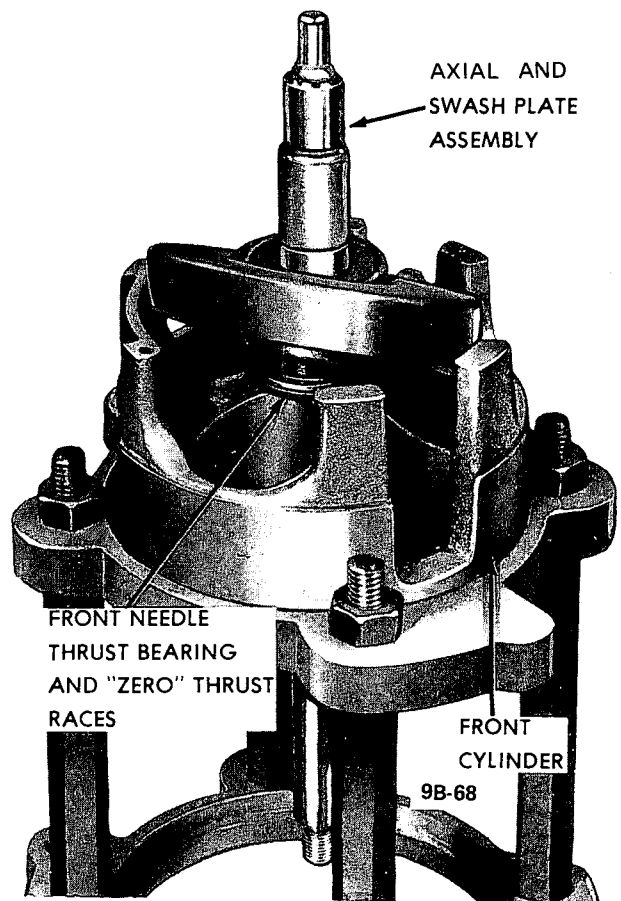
B-94 Shaft and Front Needle Thrust Bearing in Cylinder Half - 6 Cylinder Compressor
